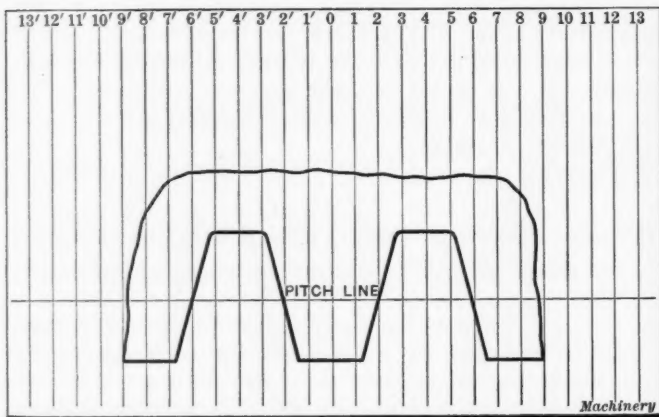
Short Section of Rack laid out on Enlarged Scale
